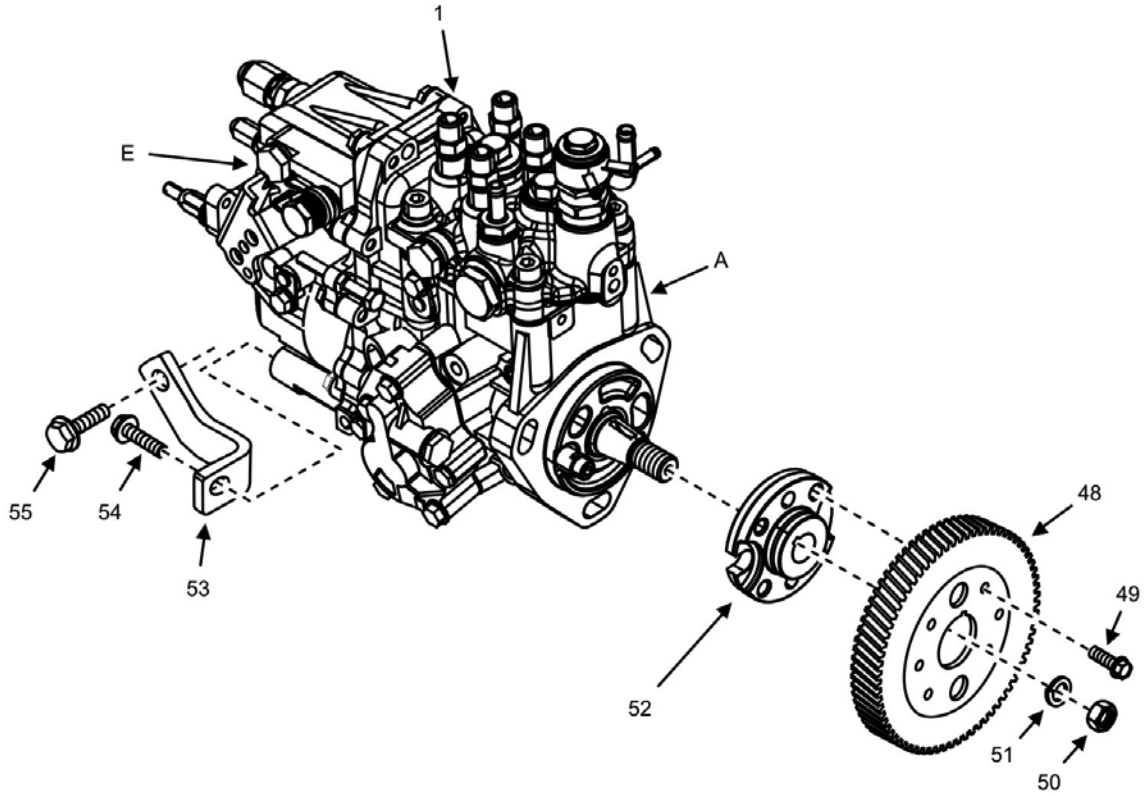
Fuel Injection Pump (Sheet 1 of 4).
